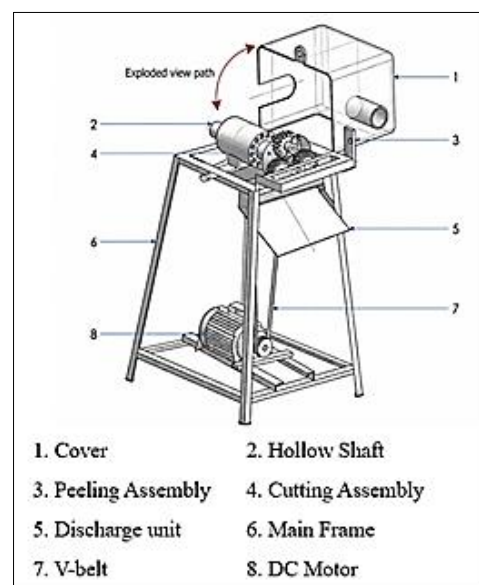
Isometric View of Sugarcane Peeler cum Cutter Machine
